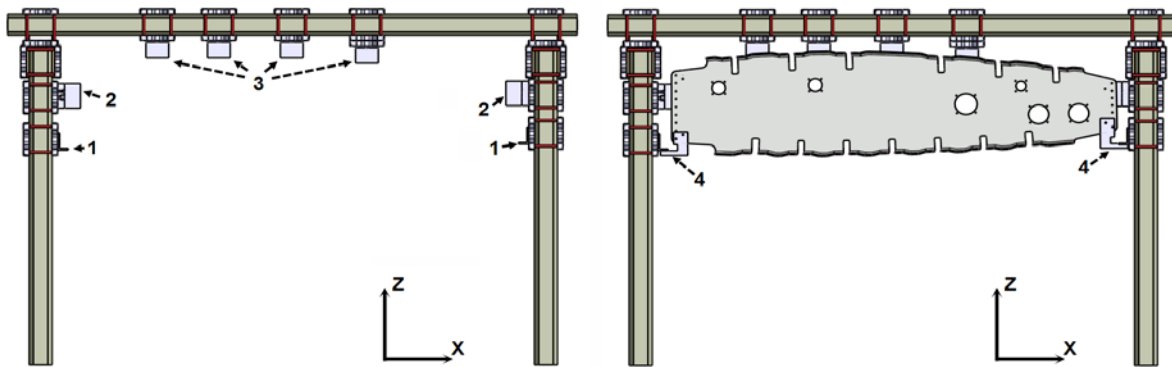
Left: Overview of the test jig and the brackets. Right: The jig with the rib in final position.
